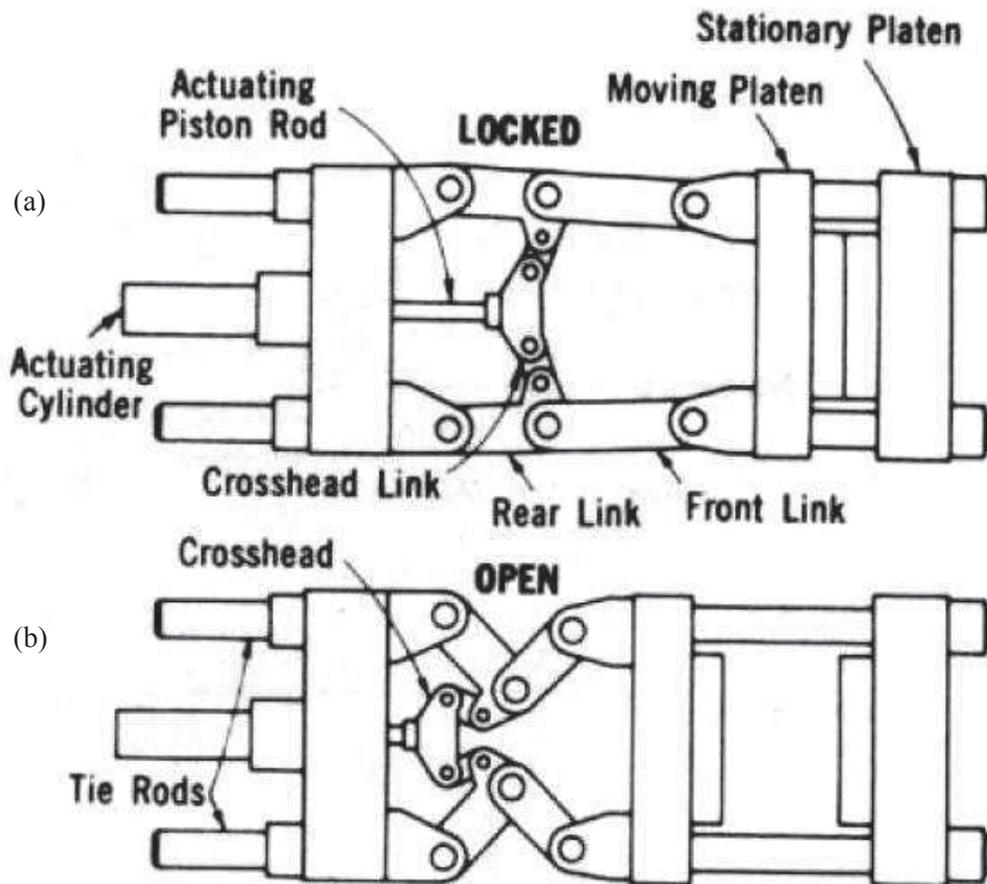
A five-point double-toggle mold-clamping mechanism for injection molding. (a) shows the clam in locked position and (b) in open position. Source: [9]
